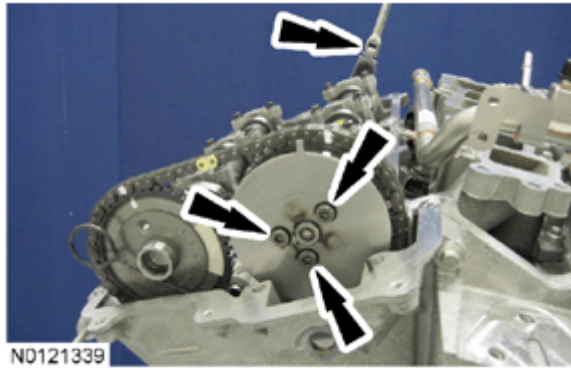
Remove/Install Camshaft Phaser And Sprocket Bolts
